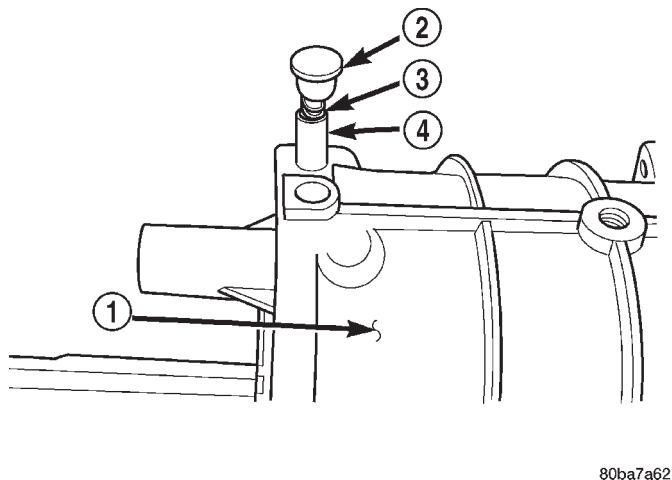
Installing Shift Shaft Detent Plunger, Spring, and Plug
